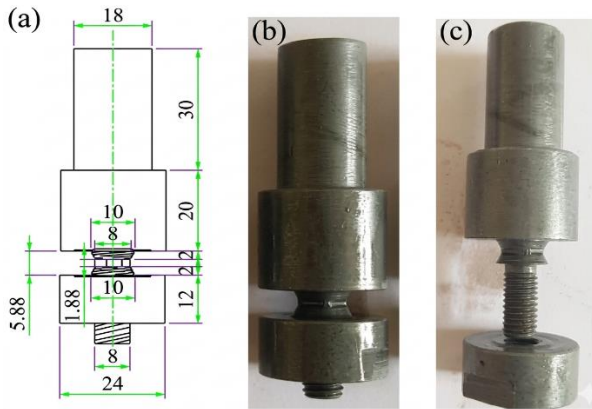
Tool used in experiment (a) 2D drawing, (b) Assembled, (c) Disassembled.
